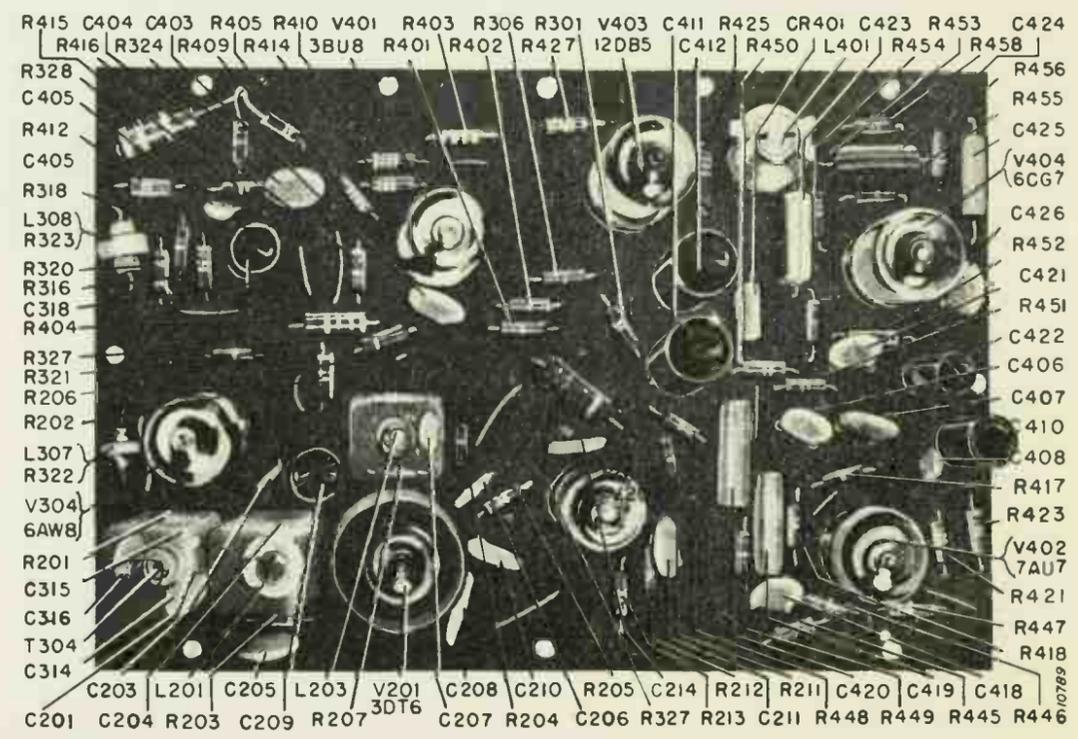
View of Component Side of Printed Wiring Board A5780-1 Used in All Chassis Except 16U1C, 16AU1C, 16W1C, and 16AW1C.
